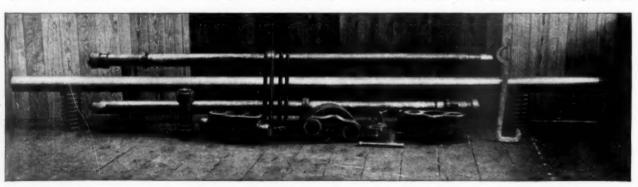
PARTS OF SIMS-DUDLEY PNEUMATIC GUN BEFORE ASSEMBLING
